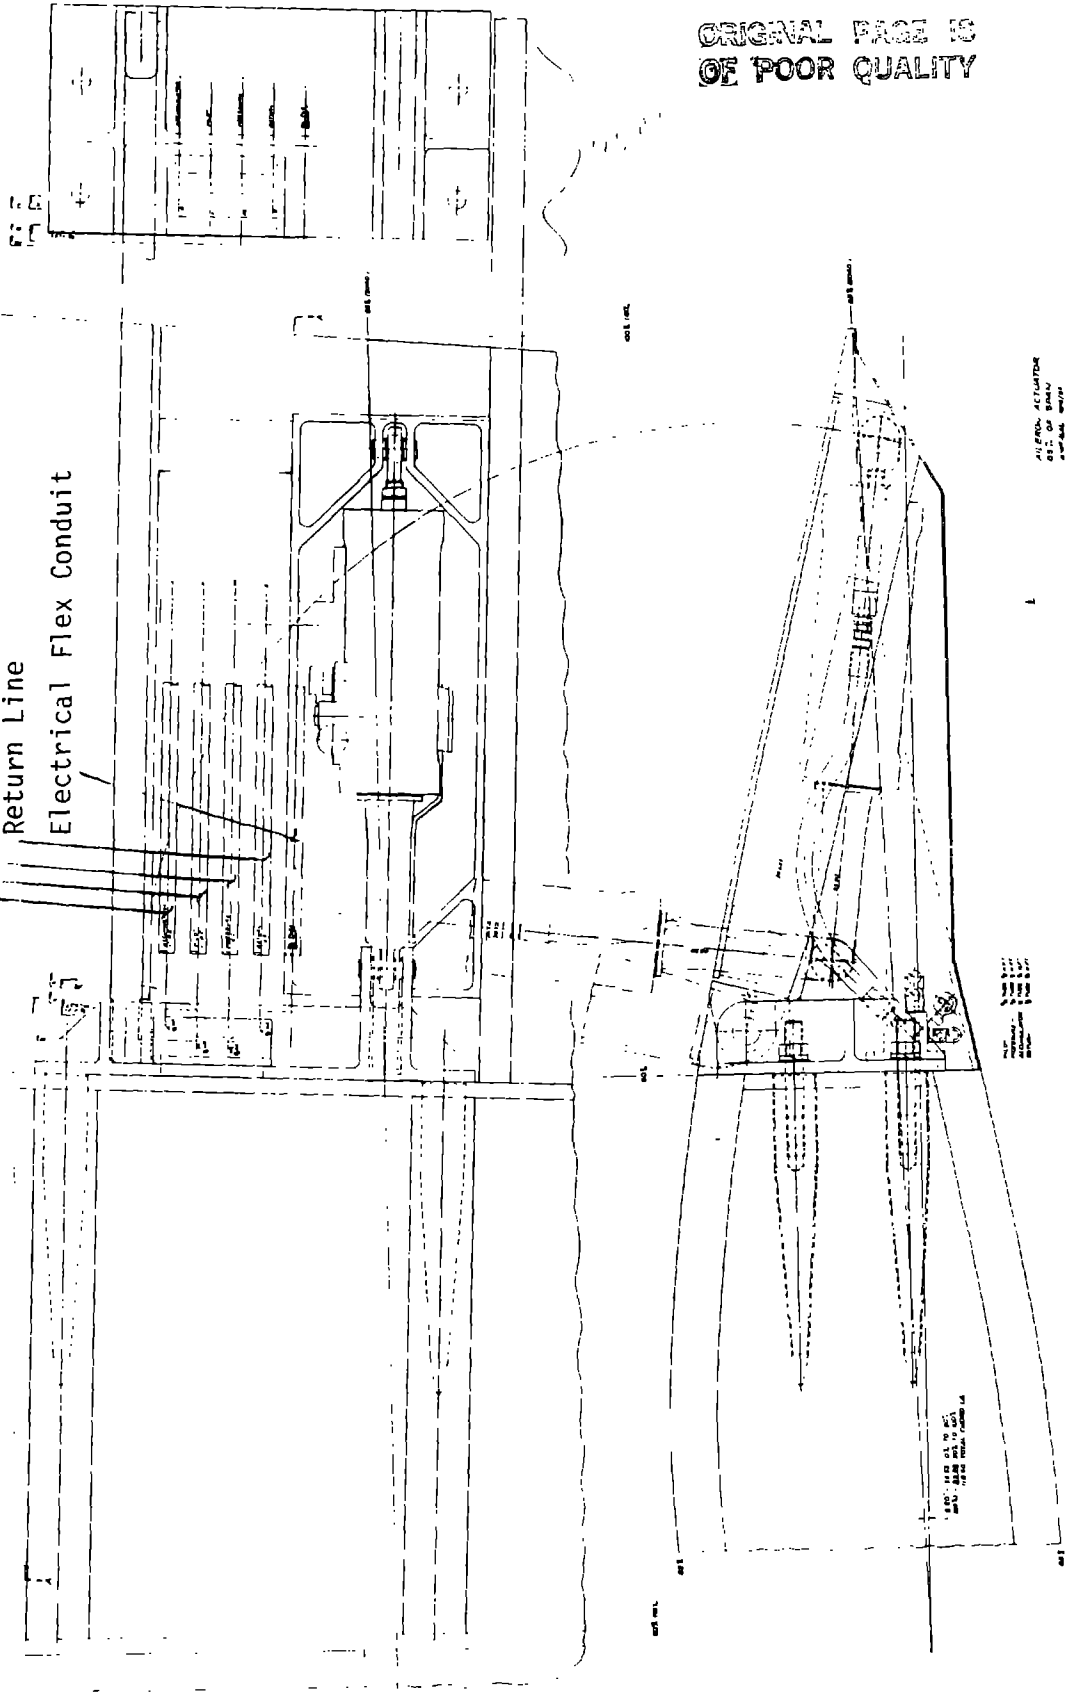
Aileron Hydraulic Flexible Line Arrangement
